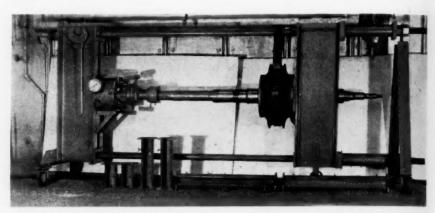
Rotor Assembly, set up in forcing press preparatory to removing sleeves and impeller; press, constructed in shop of St. Louis County Water Co., uses 75-ton portable hydraulic jack with 9-inch stroke; on floor are spacers used ahead of nuts on right ends of draw rods; by various combination of spacers any length up to 84 in. can be accommodated in press.
